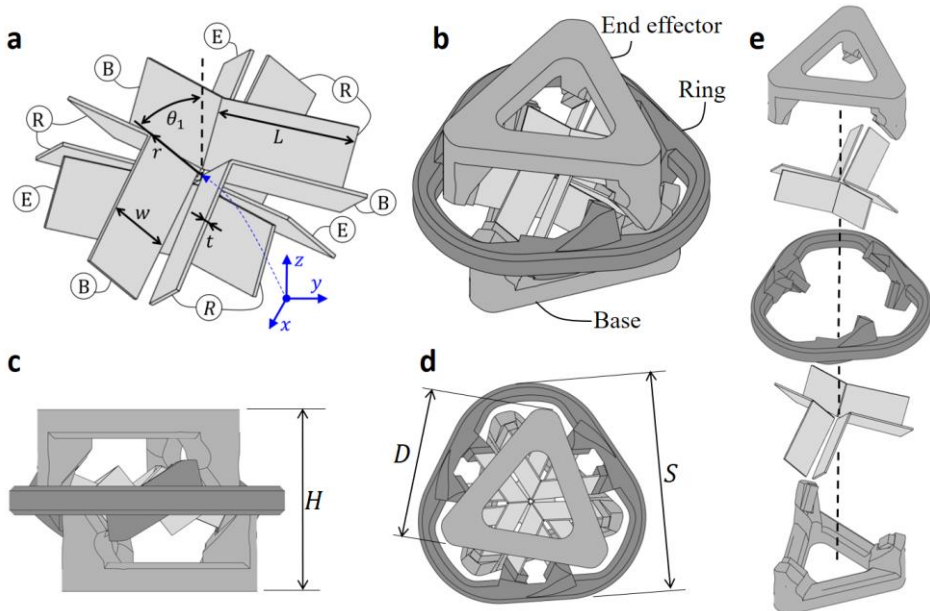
Spherical joint. a) flexures, showing the connections with ring (R), base (B) and End-effector (E). b) flexures and frame-parts, c) side view, d) top view, e) exploded view.
